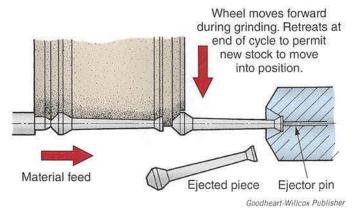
Form grinding of this engine part is done at rate of 200 pieces an hour. The material was heat-treated before grinding.
